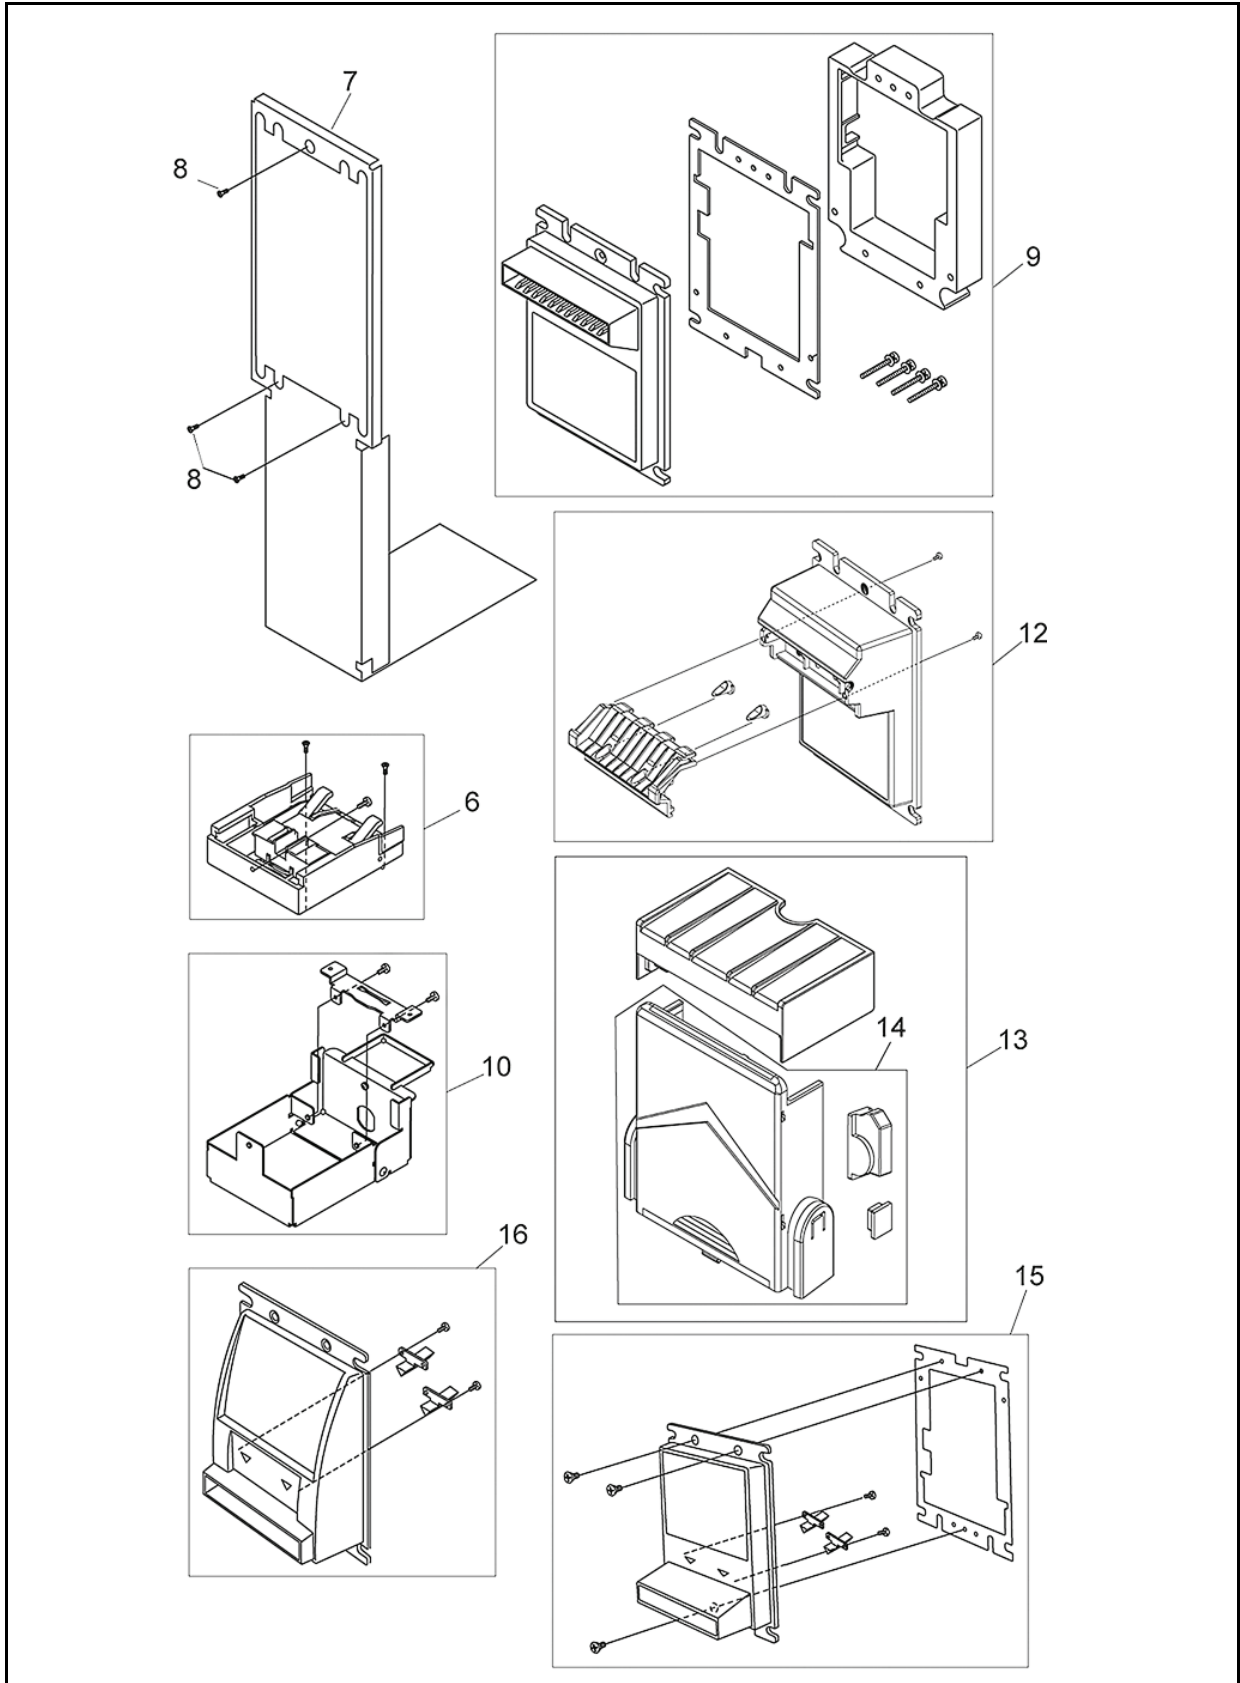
DBV-30X Bill Validator Primary Component Parts Exploded View Diagram (Part 2)
